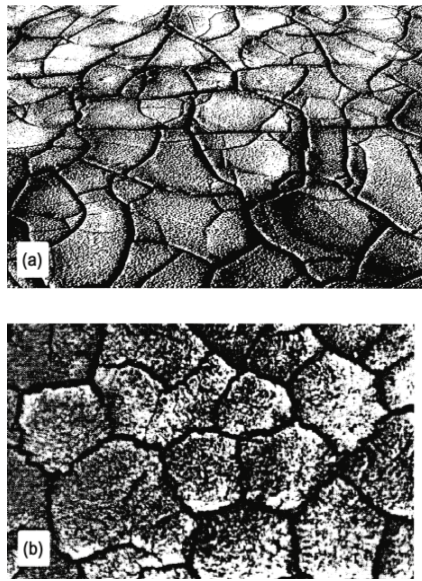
(a) dried-out mud flats in Death Valley, typical plate size 250 mm; (b) craze cracks (heat-checking) on bore of a gun tube, typical plate size 0.6 mm [23].
